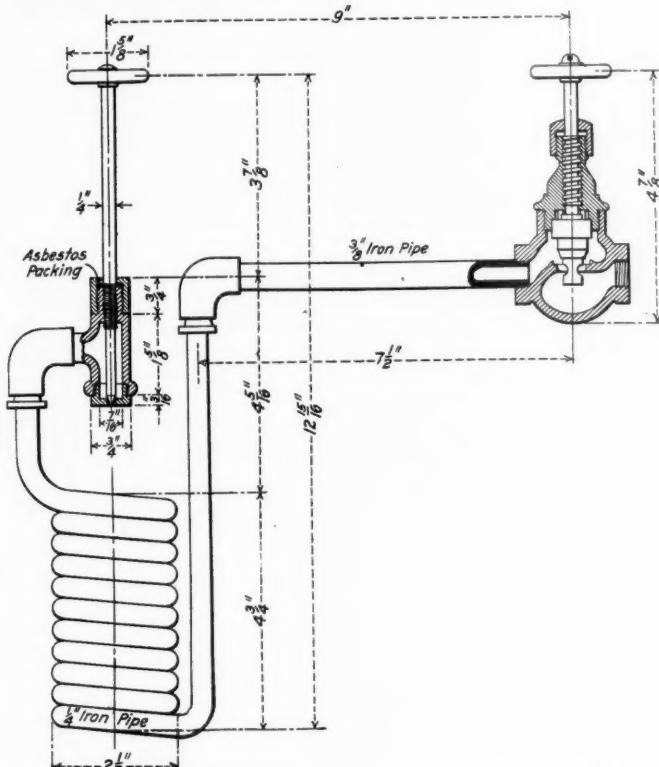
Paint Burner for Passenger Cars. Robbins.
